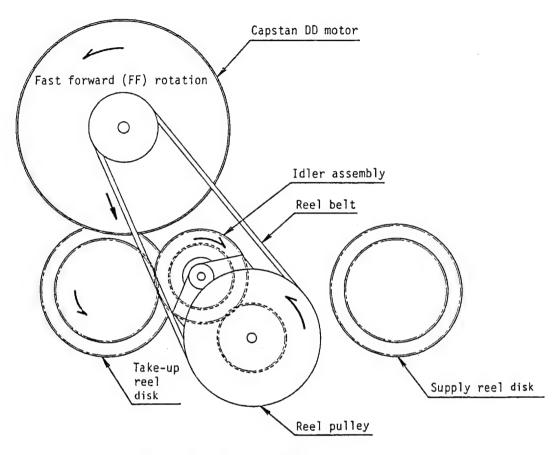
Cassette Tape Take-up Mechanism 1 (Lower stage)
